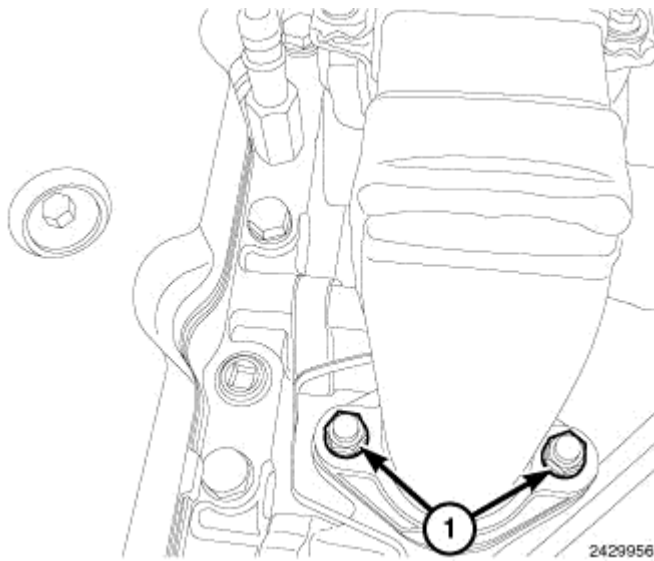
Breather Hose, Breather Tube & Bolt
